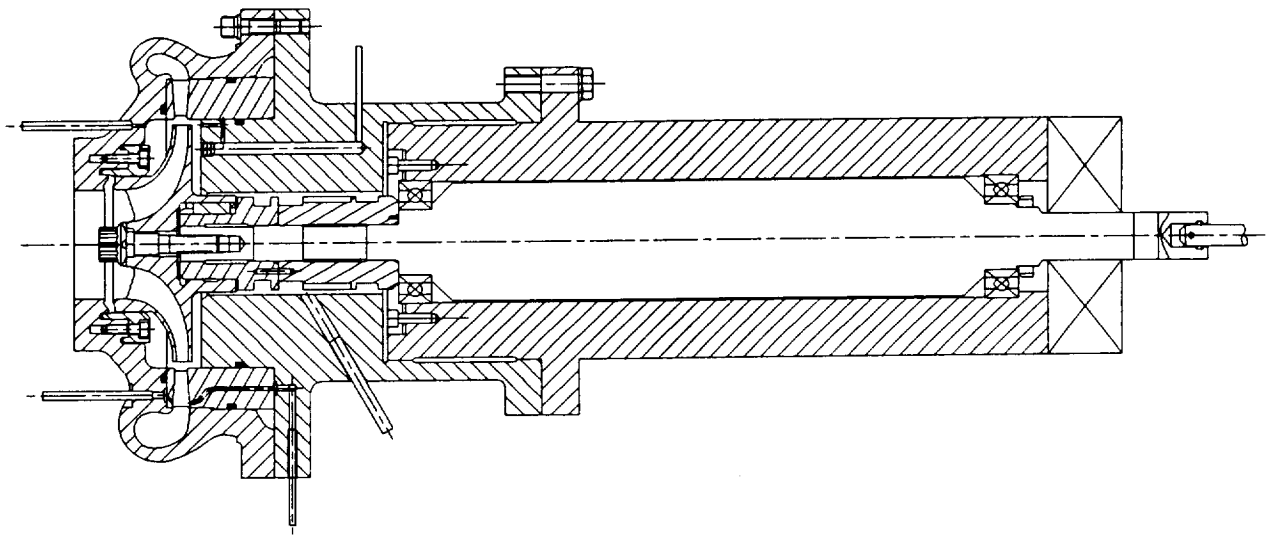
Cross-Section of the SSME Preburner Pump Air Test Rig
